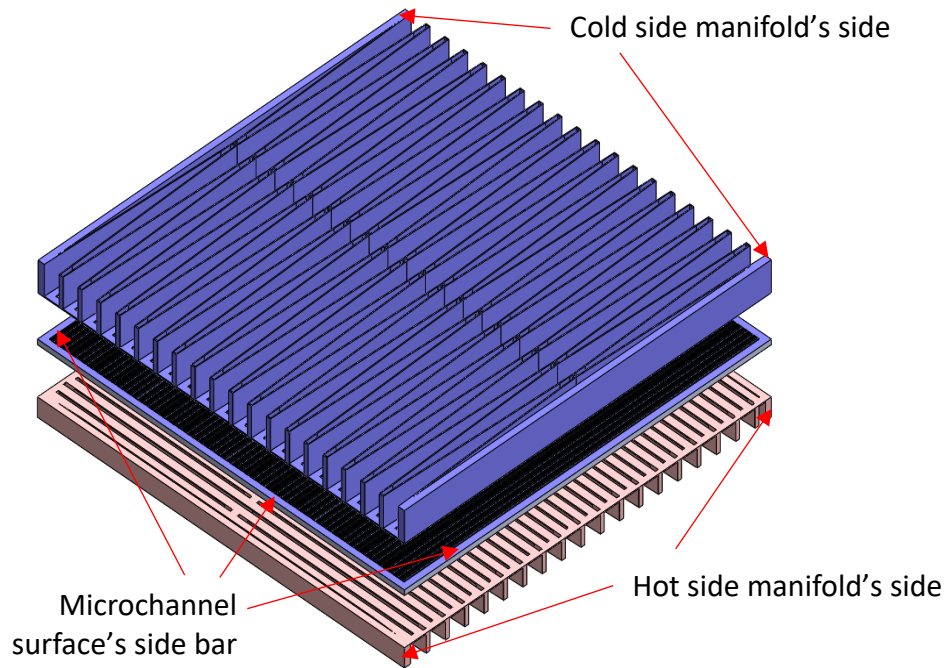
Exploded view of assembly design for one stack of cross-flow manifold-microchannel through diffusion bonding
